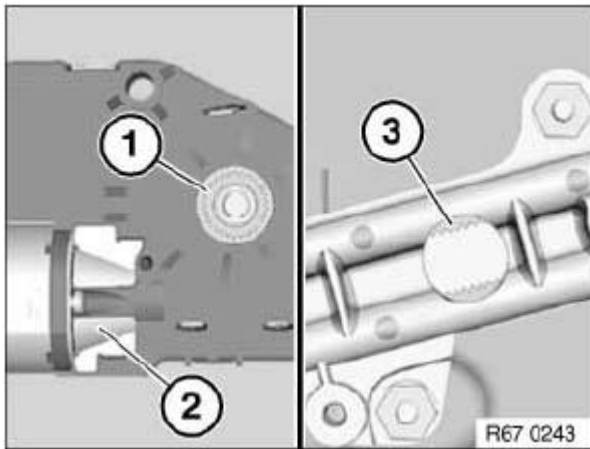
Identifying Gear Wheel, Sunroof And Gear Teeth
